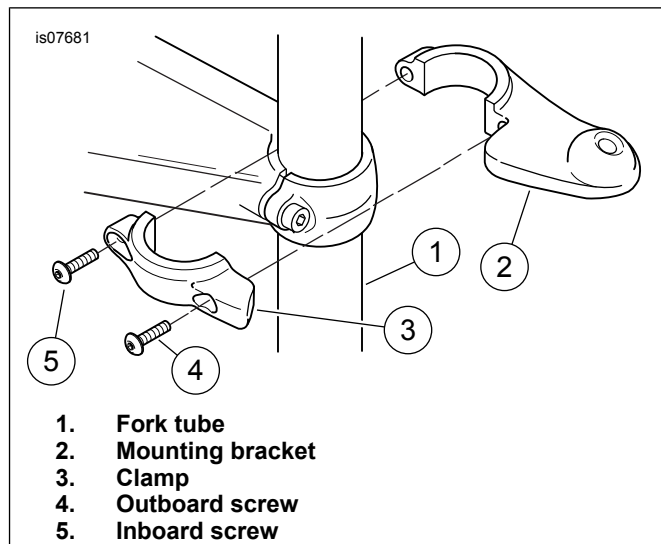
Install Mounting Bracket on Fork Tube (Right Side Shown)
